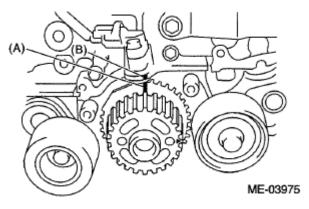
Aligning Mark On Oil Pump Courtesy of SUBARU OF AMERICA, INC.
